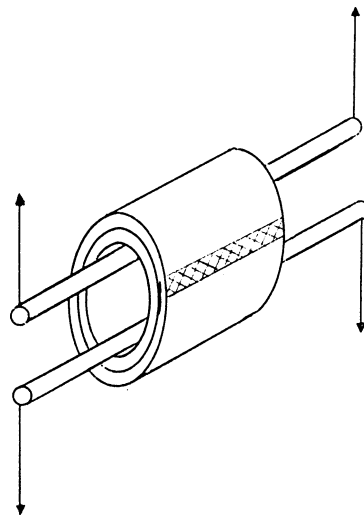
Schematic Presentation of the Pipe Ring Test Showing the Aluminum Weld at 90° to the Tensile Axis
